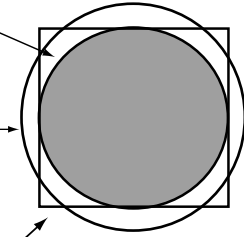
Footprint - 5 mils stencil - non solder mask defined
